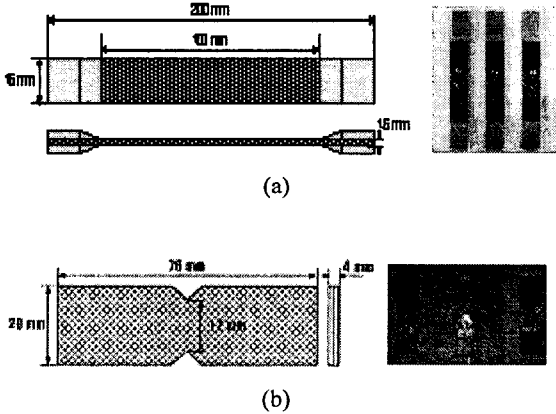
Test Specimens; (a) Tensile and (b) Interlaminar shear
